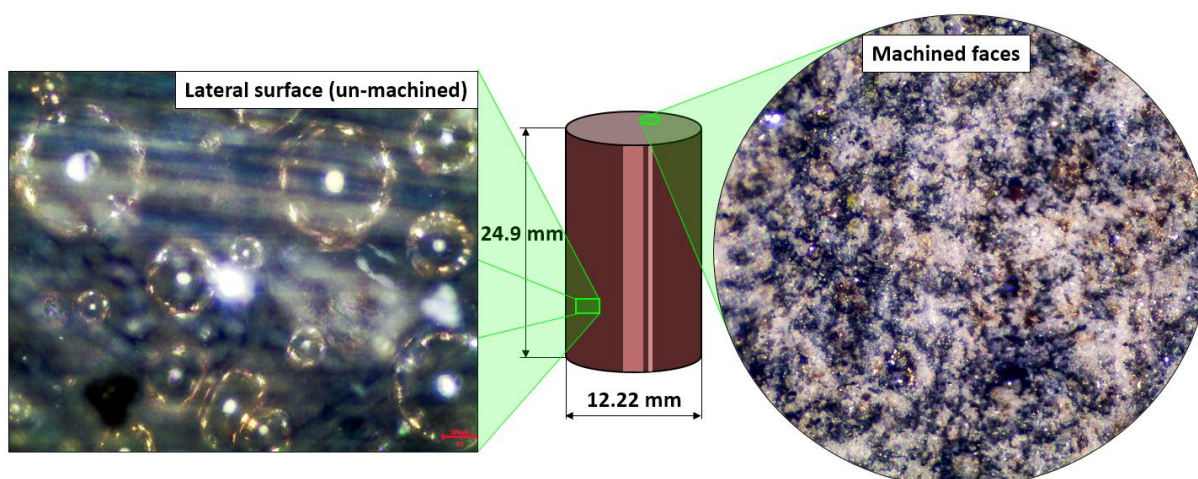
Size of the compression specimens and view of the surfaces under the microscope.
